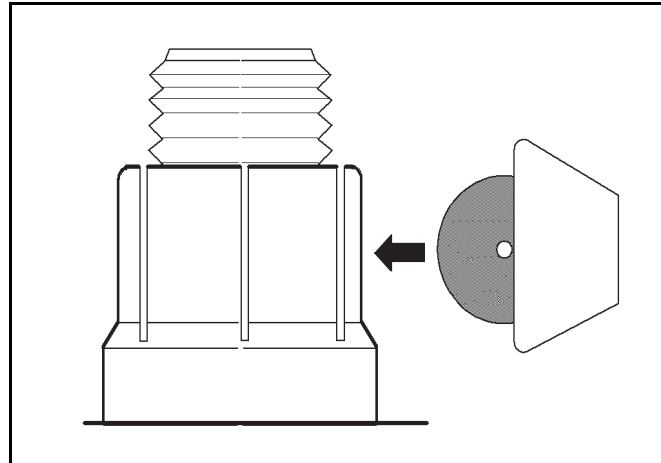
Cutting Collar with Wheel Grinder 01_0024
